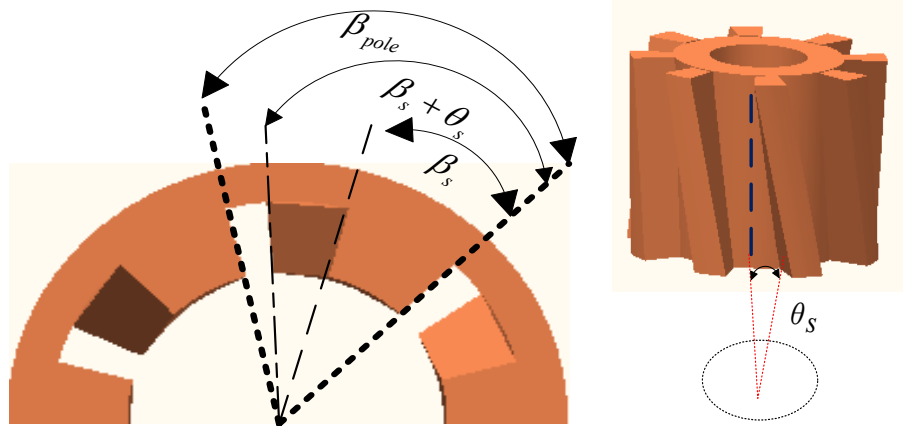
Definition of the skewing angle: (a) Stator, (b) Rotor.
